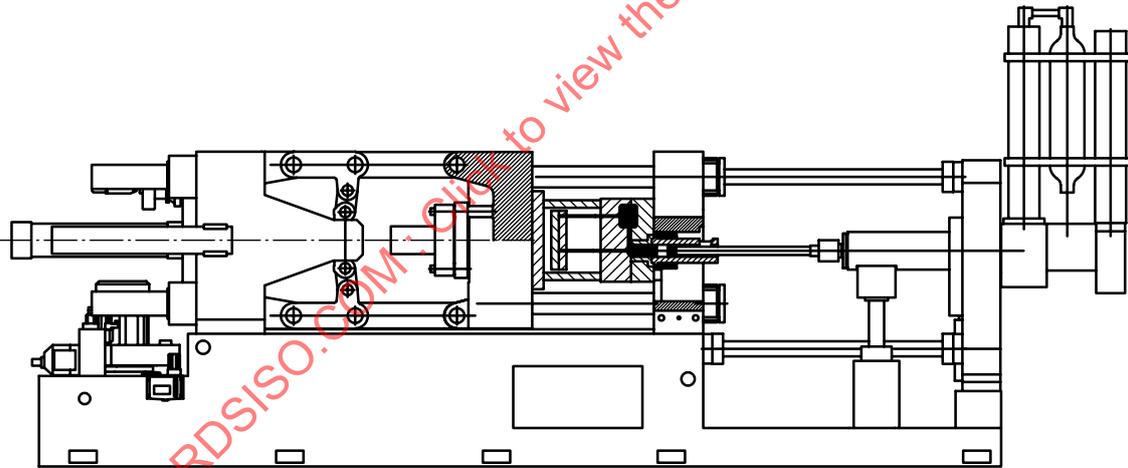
Example of a horizontal cold-chamber die casting machine with a toggle die closing system
